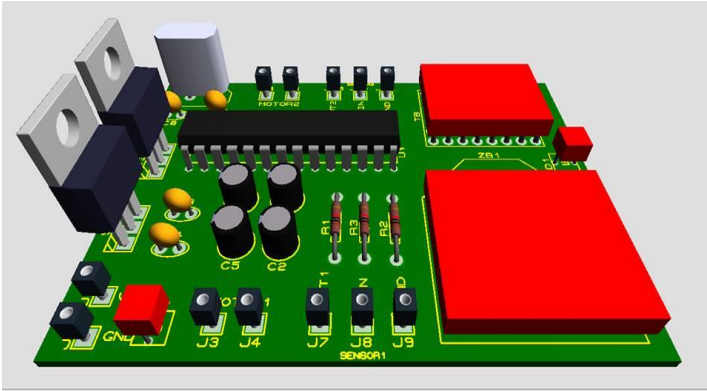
Rodetas® Eletronic Board design (PROTEUS-ARES)
